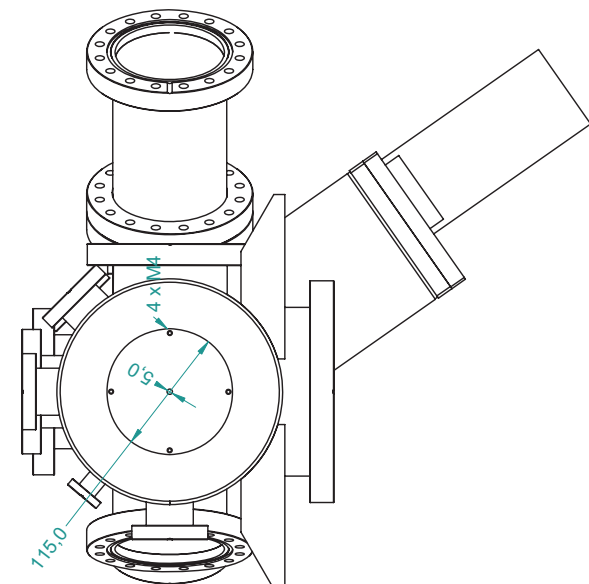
Photograph of the ultra-high vacuum chamber. On the backside a technical drawing of the UHV chamber is included which is printed with the kind permission of VAb Vakuum-Anlagenbau GmbH.
